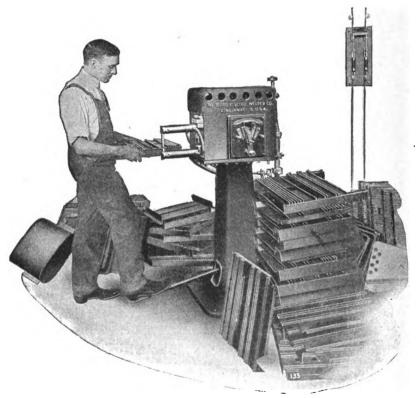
Spot Welder for Pressed Metal Frames Courtesy of Toledo Electric Welder Company
